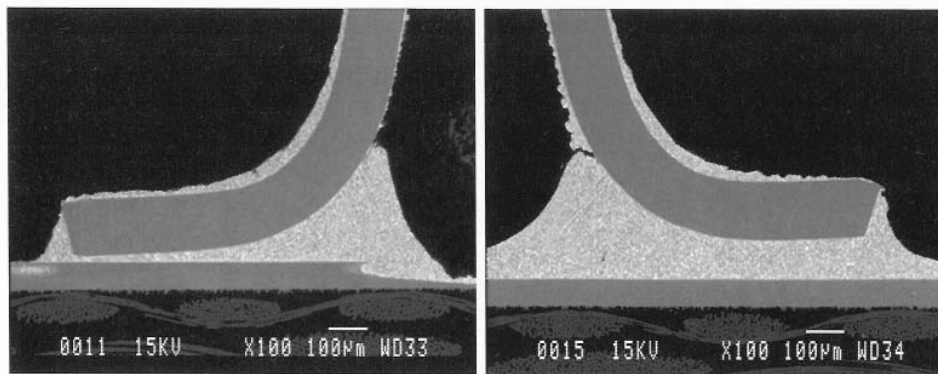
Microsections of corner solder joints on the board with CV-2946 as staking compound
